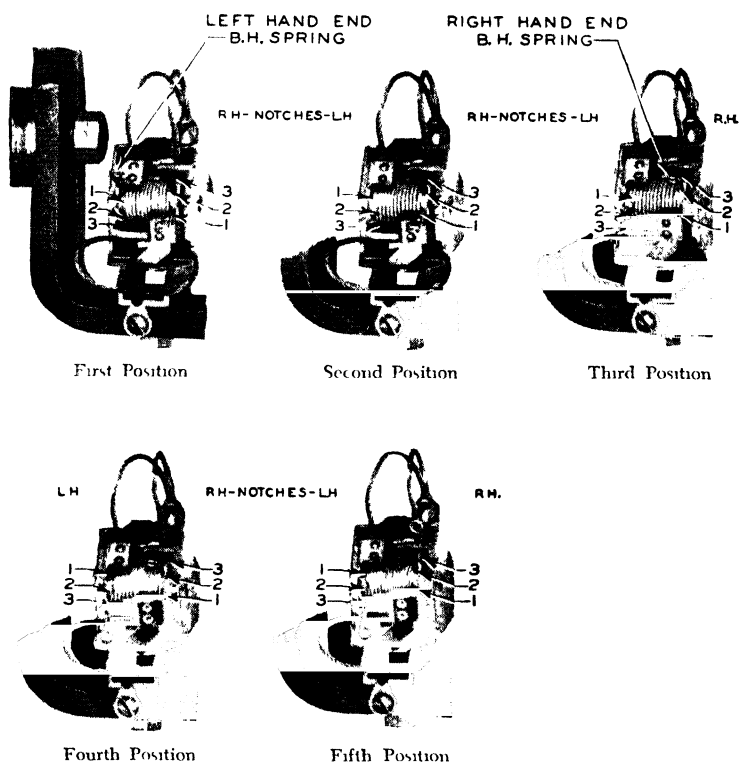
Spring End Settings for Adjustable Brushholder Springs for Traction Generator
